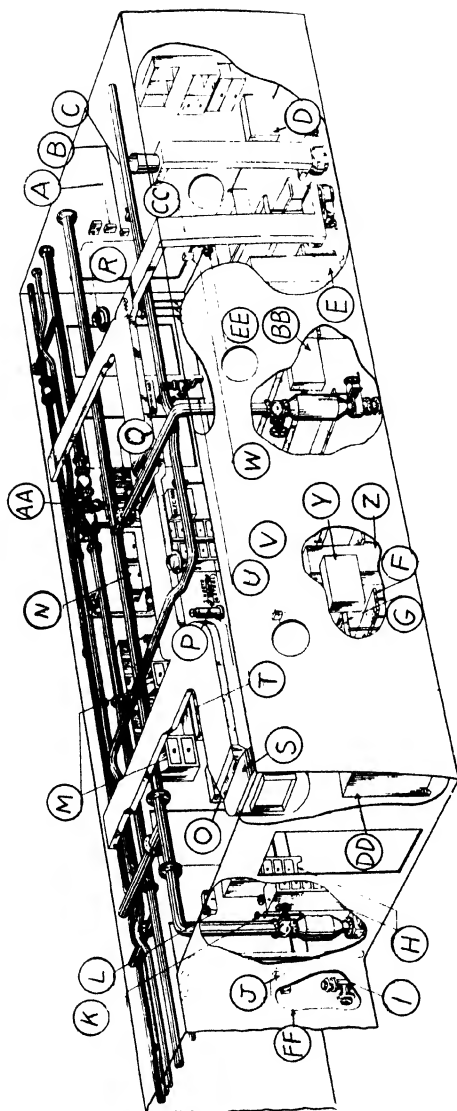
Isometric drawing of escort vessel Crew's Mess.
